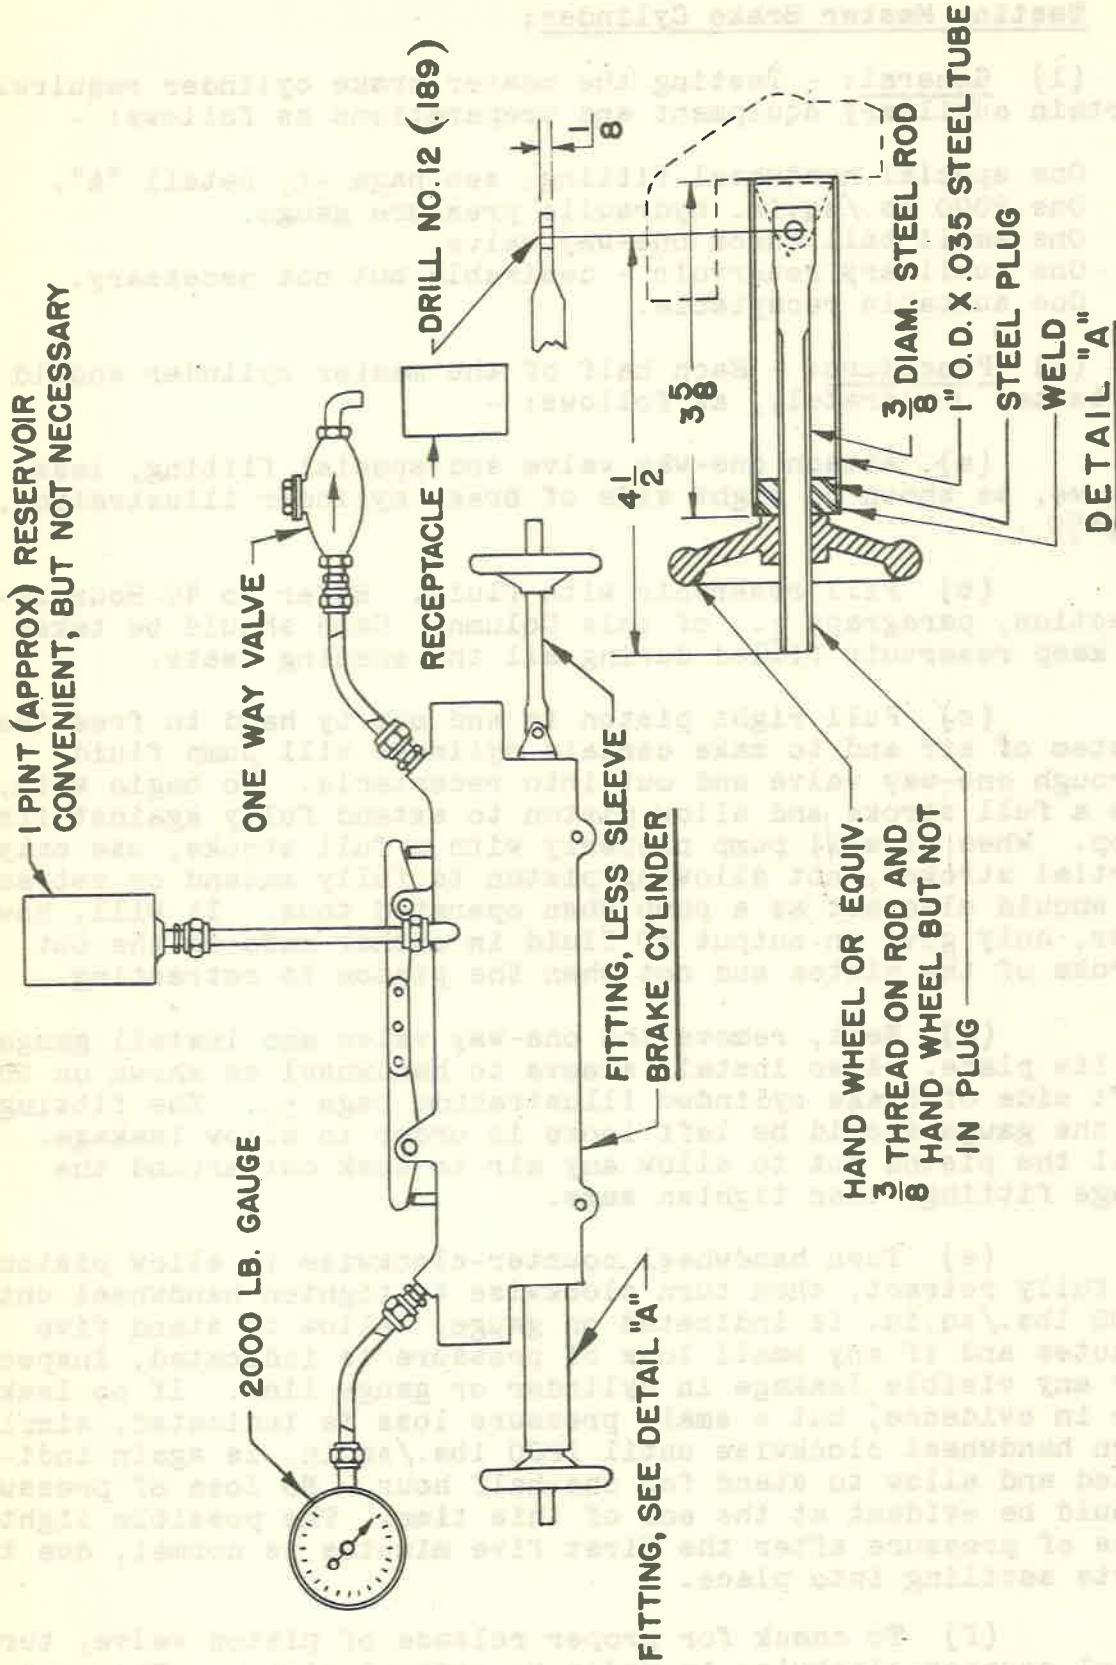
TEST EQUIPMENT - MASTER BRAKE CYLINDER
